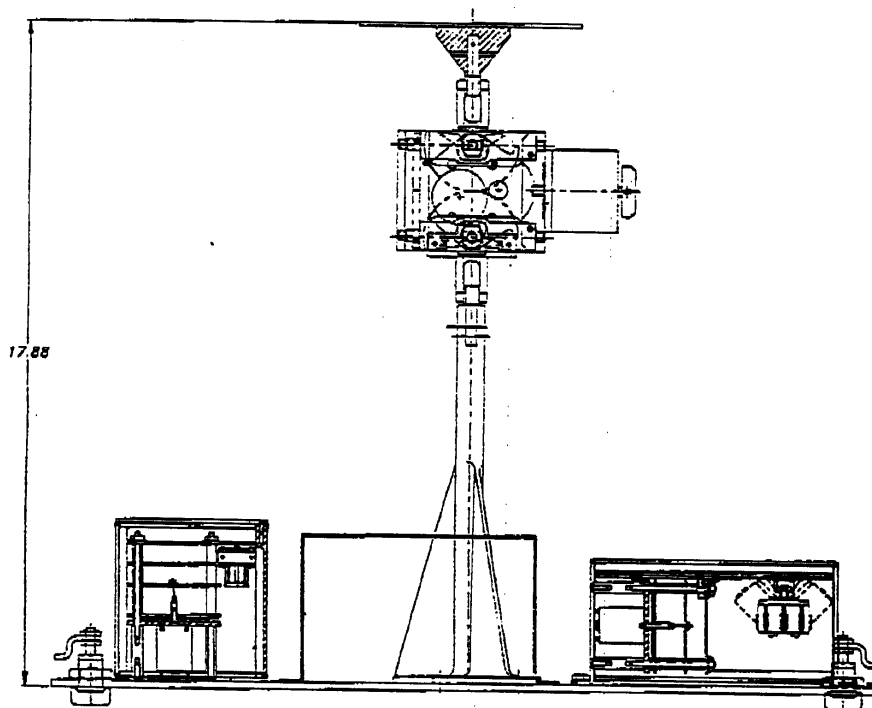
SkyFix Mini Dome Basic System Layout ( elevation )
